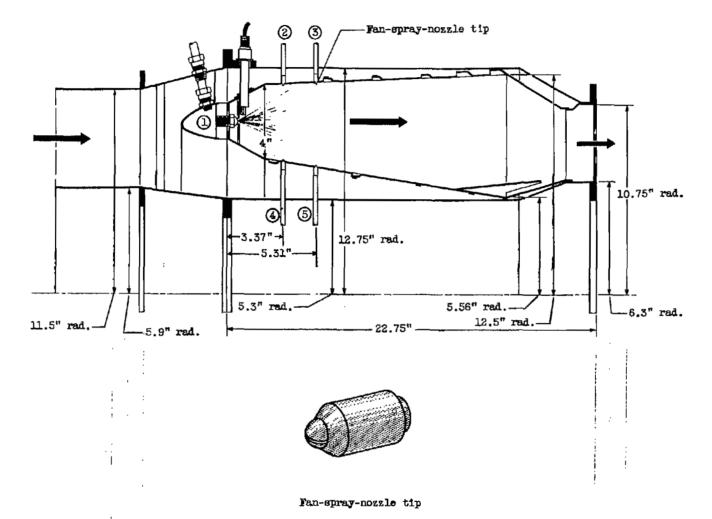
Longitudinal cross section of combustor assembly showing detail of fan spray nozzle. (All dimensions are in inches.)
